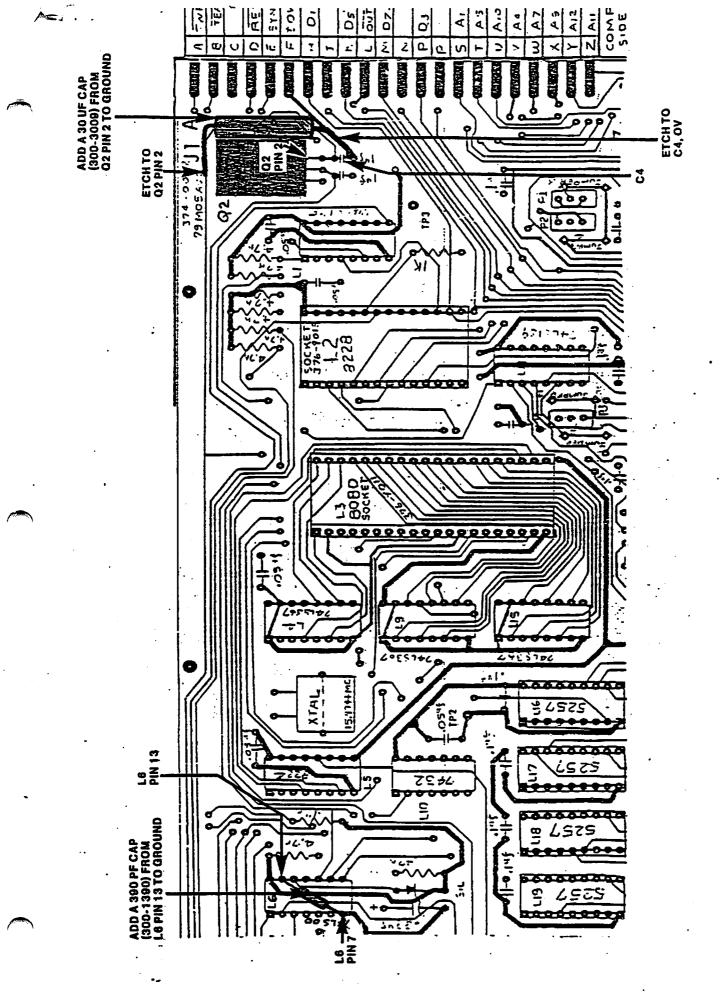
210-7591-A PCB ASSY, CAP LOCATIONS
